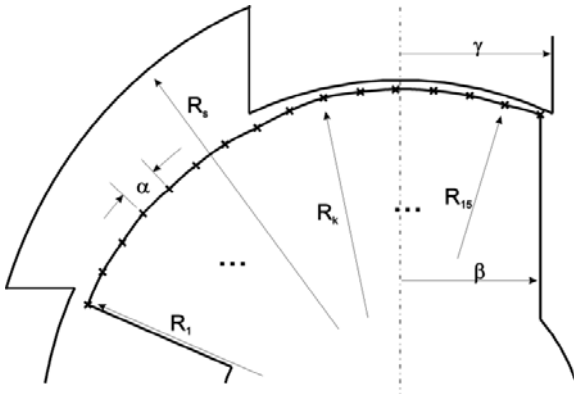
A fragment of the motor core with marked dimensions being optimized.
